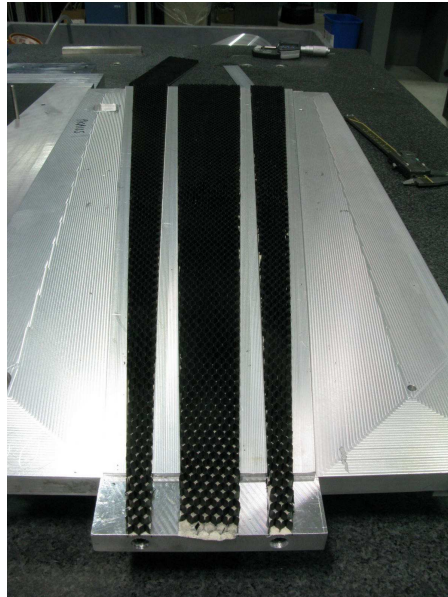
Honeycomb with final dimensions placed over honeycomb plate.
